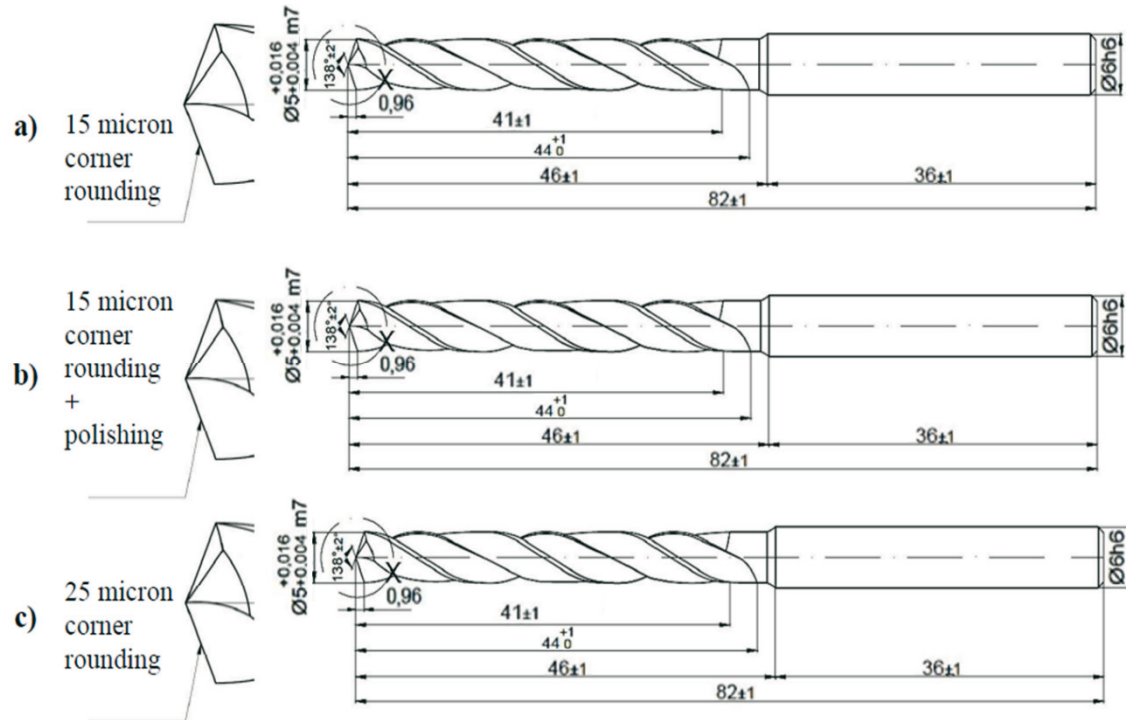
(a) Drill type A used in L1 to L9 drilling tests; (b) Drill type B used in L10 to L18 drilling tests; (c) Drill type C used in L19 to L27 drilling tests
